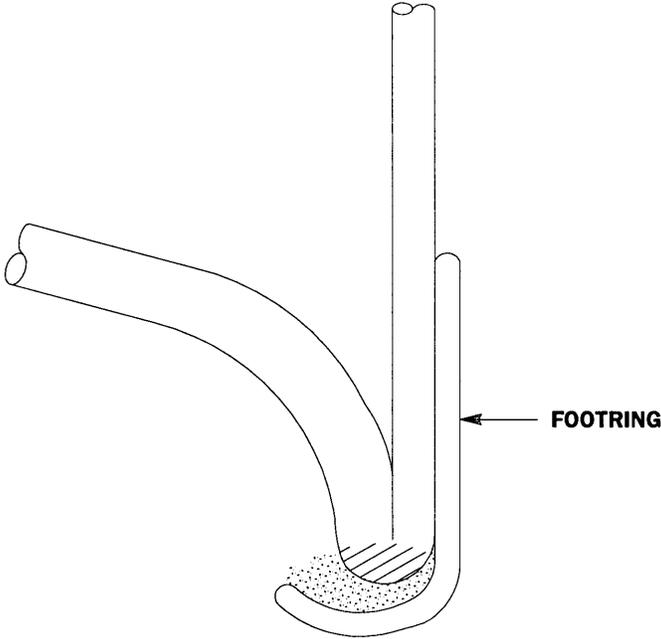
Bottom Head-to-Sidewall Weld Arrangement
